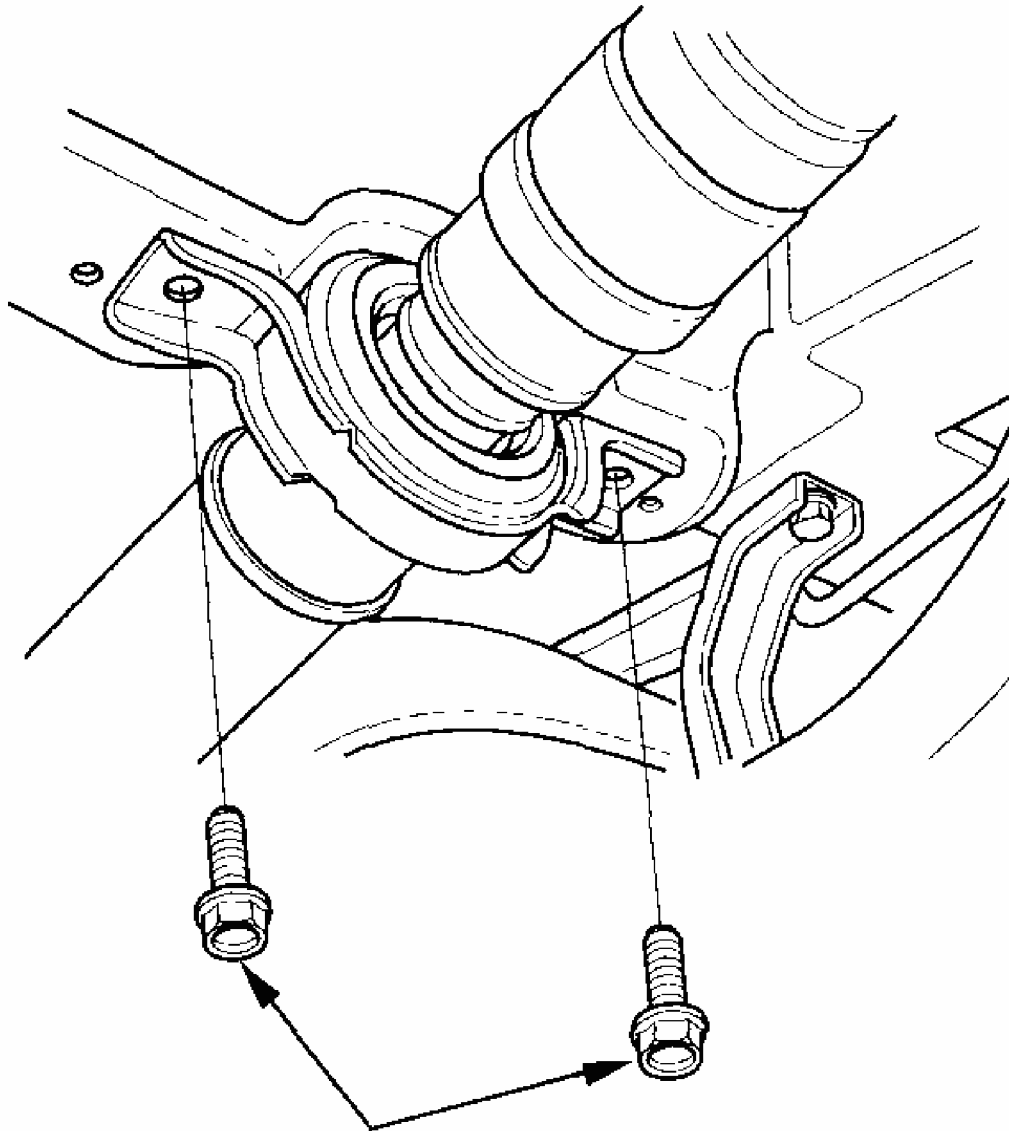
Installing New Propeller Shaft Mounting Bolts And Torque Specifications
